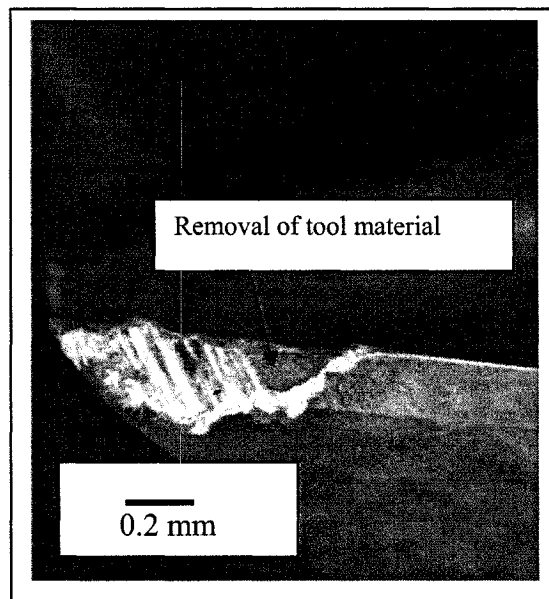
Wear surface, cutting speed = 70 m/min (1170 rpm), depth of cut = 2.2 mm, feed = 0.025 mm/tooth, unstable (chatter)
